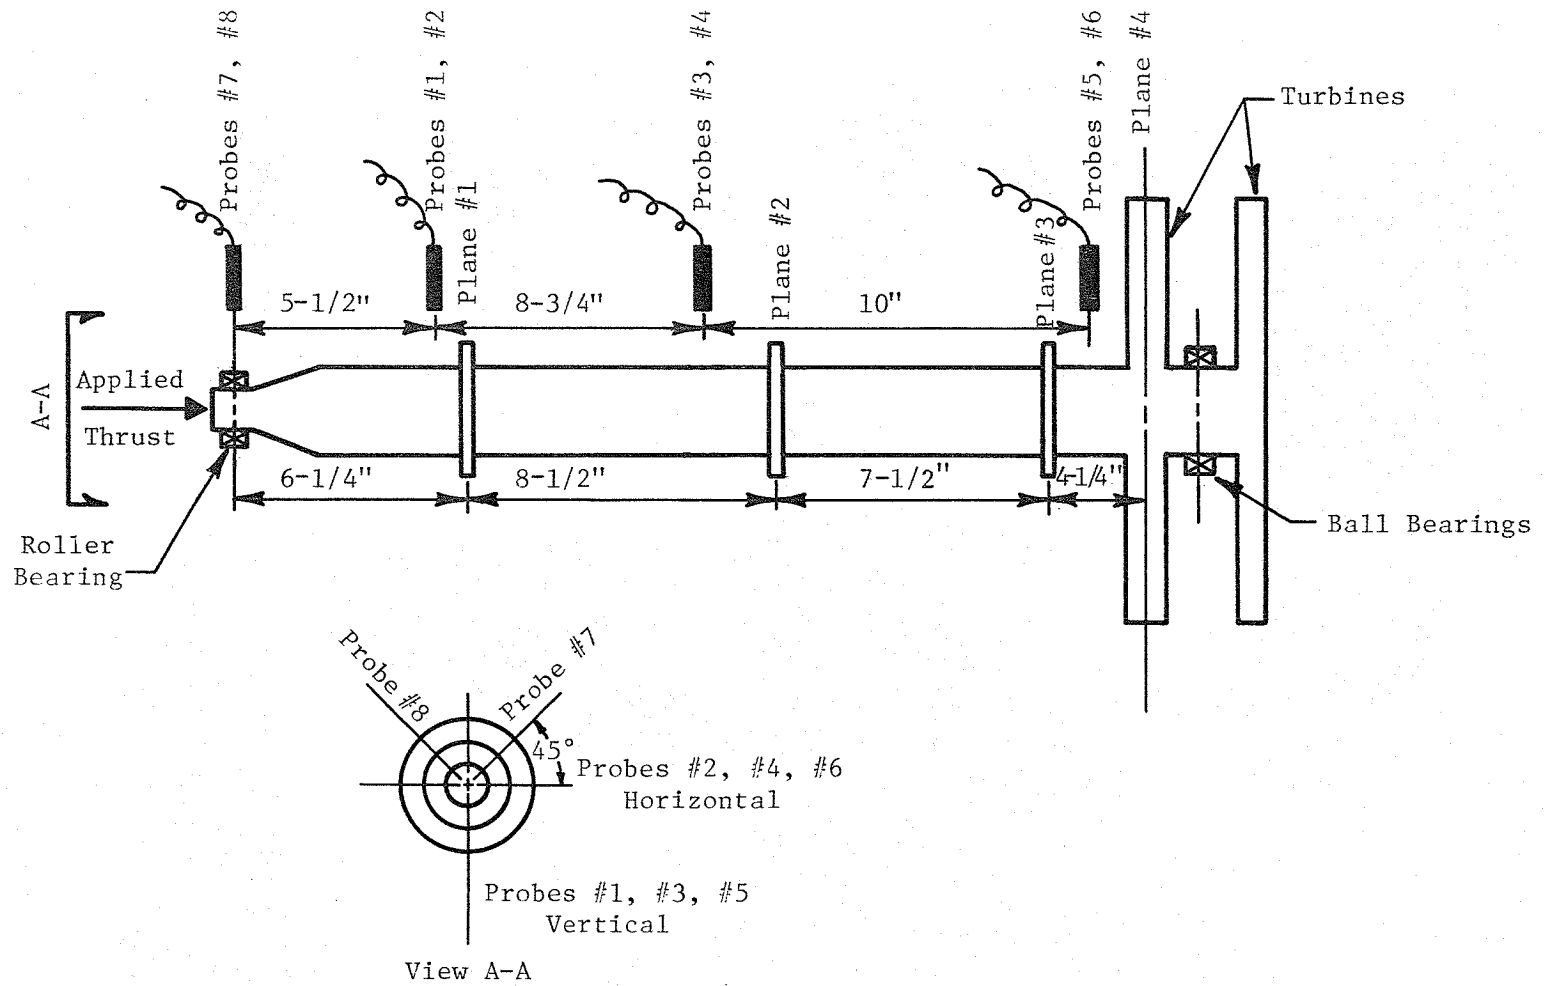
T-55 Power Turbine Rotor in CCAD Rig
